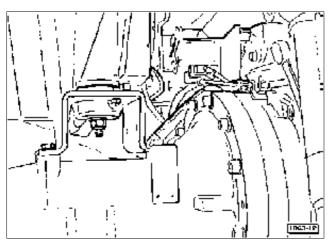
Remove the bolts anchoring the cab to the rear silent-blocks (left and right hand side).
